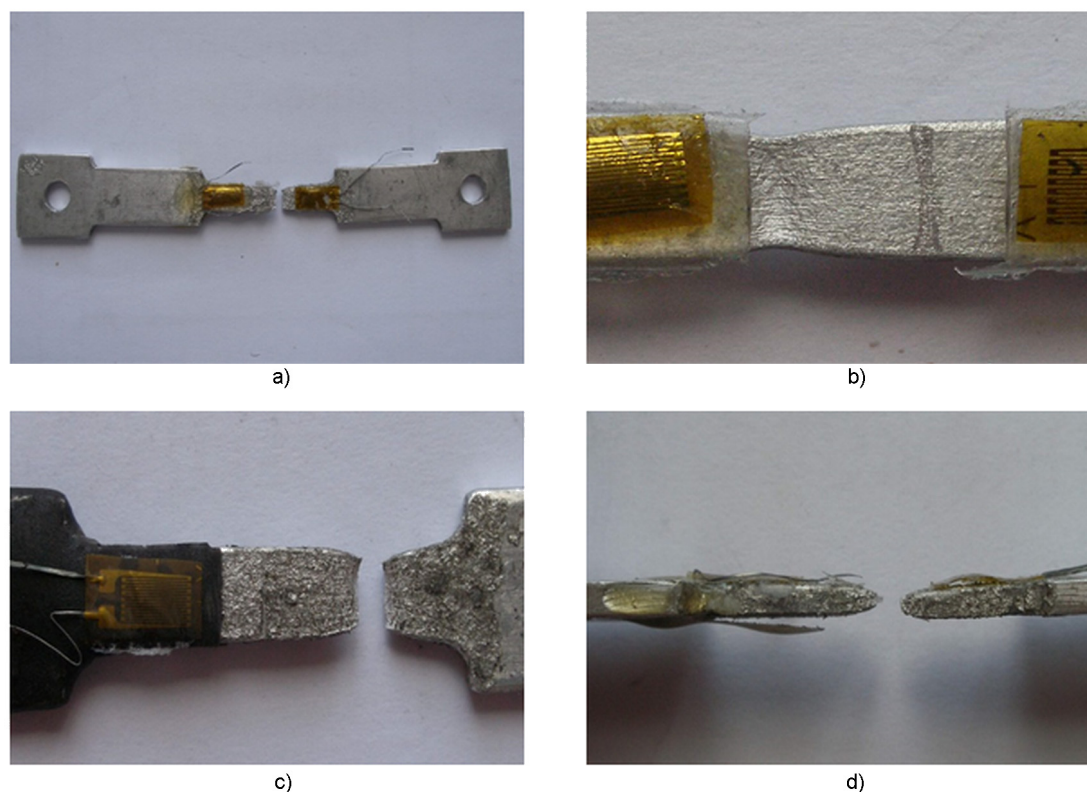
General view of samples after deformation: a) general view of the sample; b) the beginning of fracture in the non-alloyed aluminum base; c) the view of base alloyed surface; d) separation of adhesive coatings at the end of testing.
